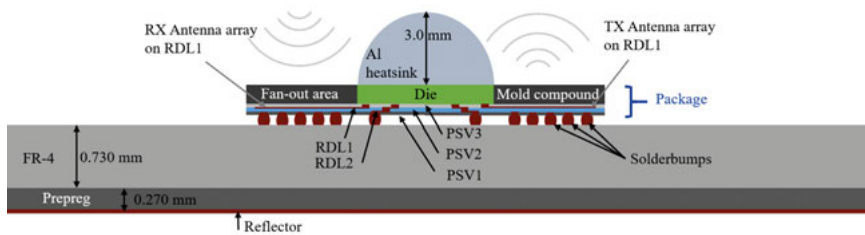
An aluminium heatsink placed on top of the chip package. Reflector backed cavities are also shown in the FR-4 PCB.
